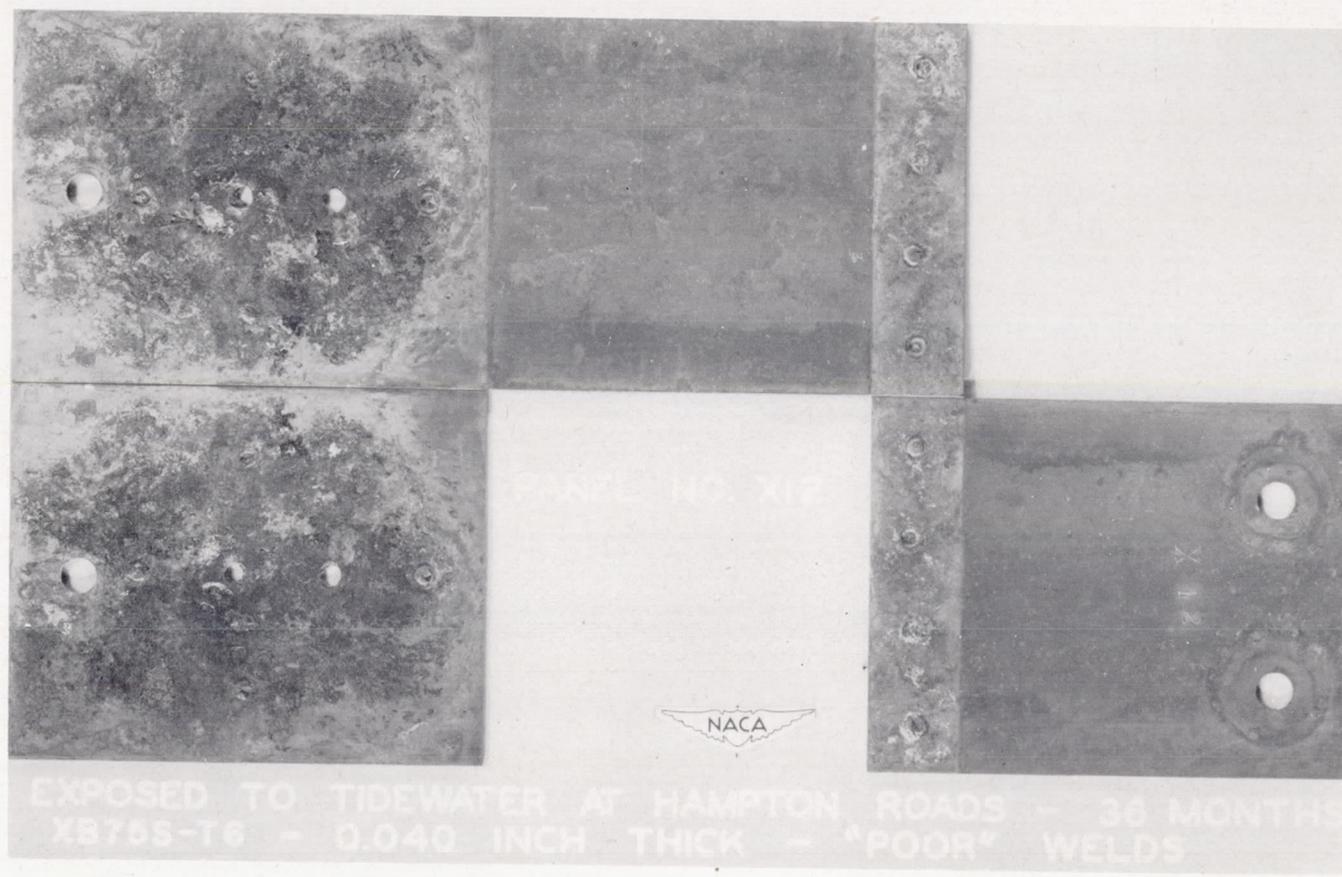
Type L. Welds separated at faying surfaces by corrosive attack, $\times \frac{1}{2}$.
